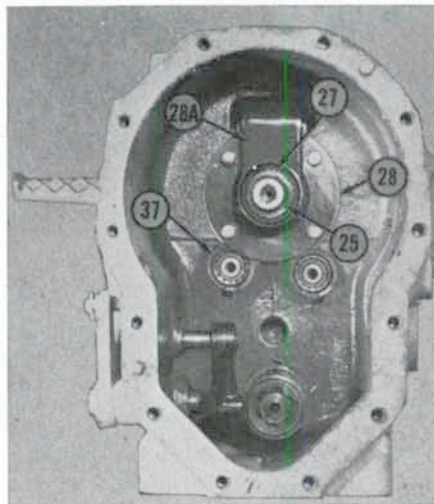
View of D-14 and D-15 "Power-Director" compartment. After the snap ring (27) and the transfer tube (28A) retaining cap screws are removed; the outer (hollow) "Power Director" clutch shaft (25), oil transfer tube (28A) and retainer (28) can be lifted out.
